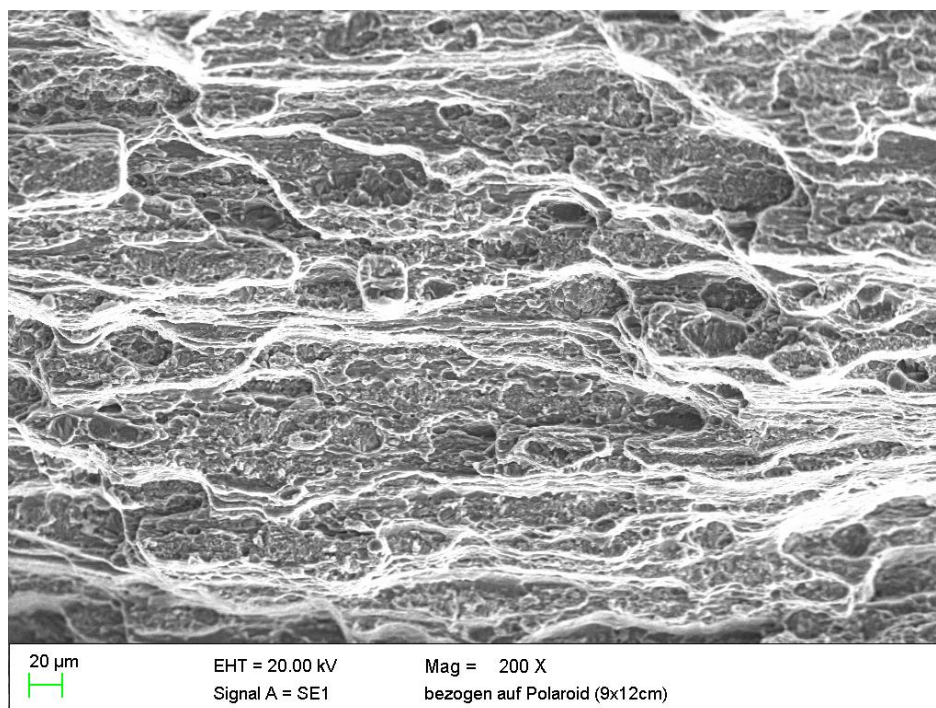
SEM image of the broken specimen: Final forced fracture; microductile fracture with dimples.
